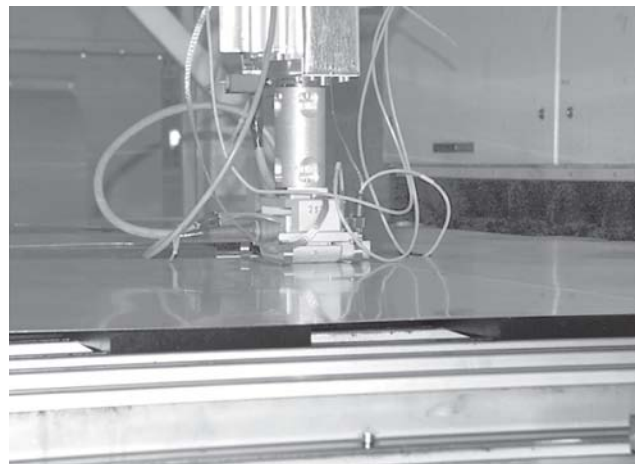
In-line weld inspection with EMAT in a gantry
